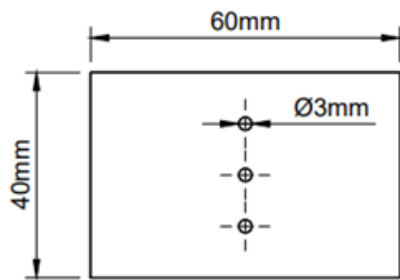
Dimensions of ASTM E10 Brinell hardness test specimen.
